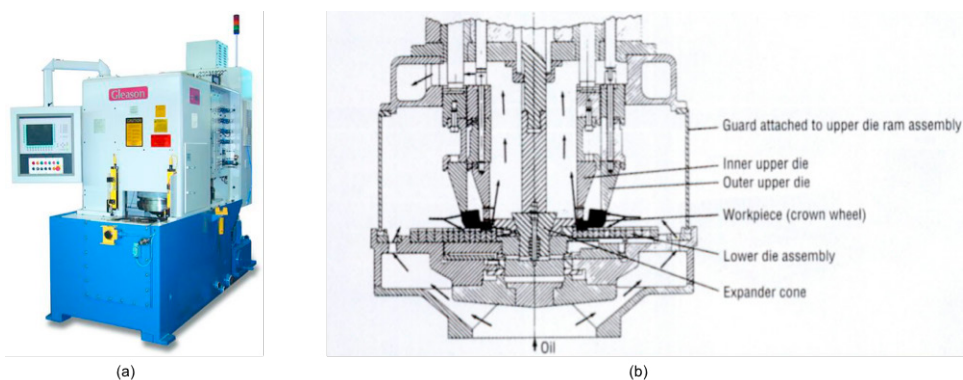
(a) Hydraulic press; (b) Quenching mould for the Die Assisted Oil Quenching (DAOQ) technique [9]
